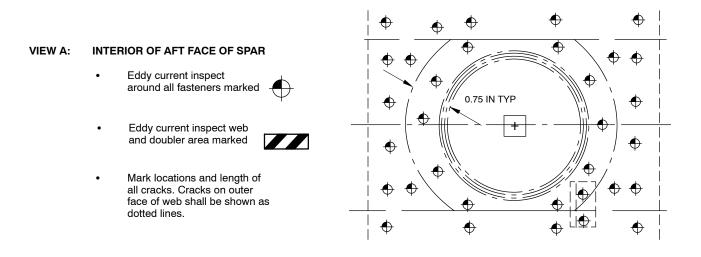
Cross Section of Horizontal Stabiliser Centre Section Showing Inspection Views
